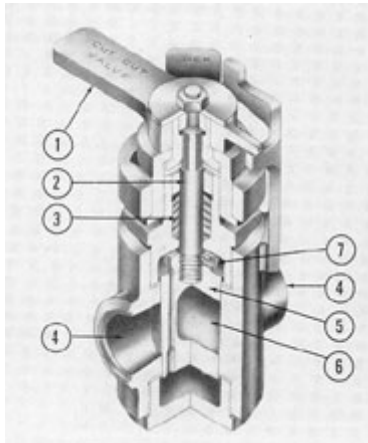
Cutaway of quick-throw, plug-type, hand cut-out valve.
